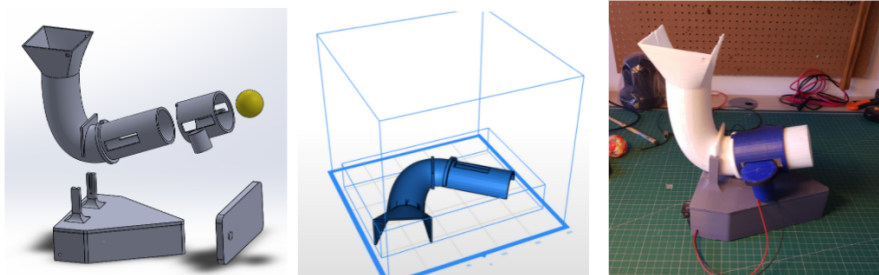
3D assembly - 3D printing - 3D final model.
